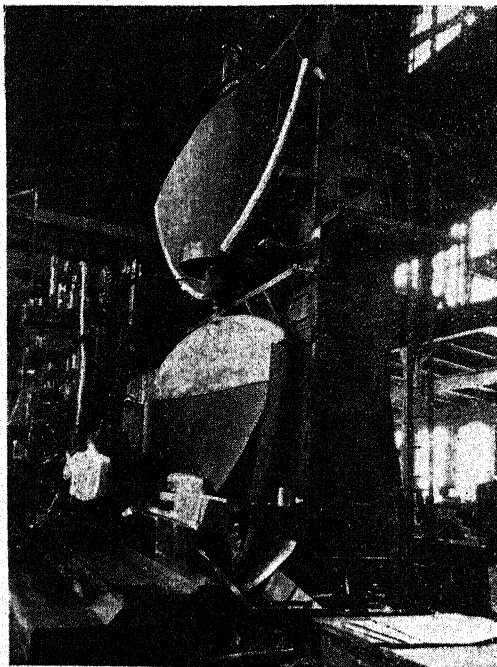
Machining prewelded blade. Photo courtesy, S. Morgan Smith Co.
